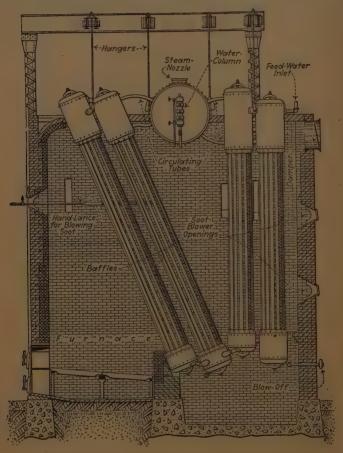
Side view of Bigelow-Hornsby water-tube boiler.
